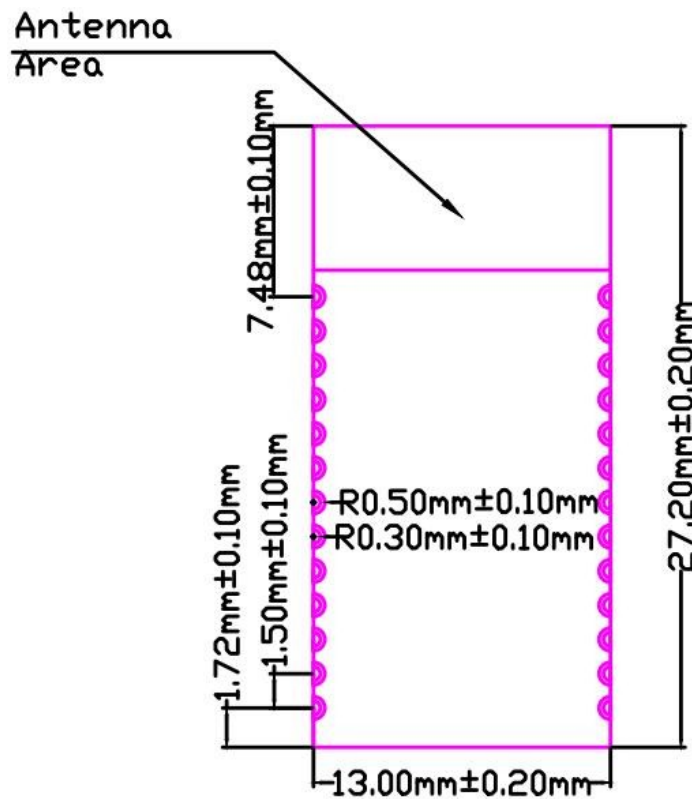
WLT3266H Module Dimensional Drawing (Front)
